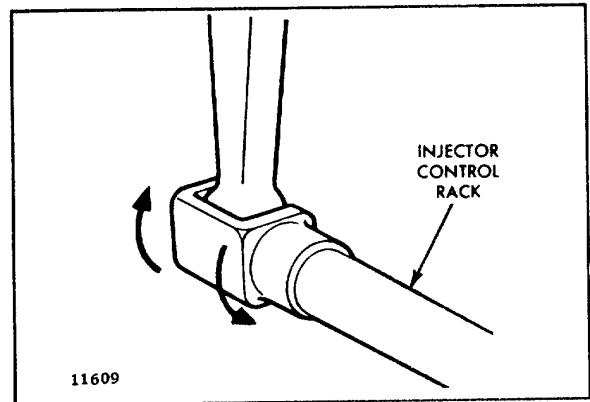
Checking Rotating Movement of Injector Control Rack
